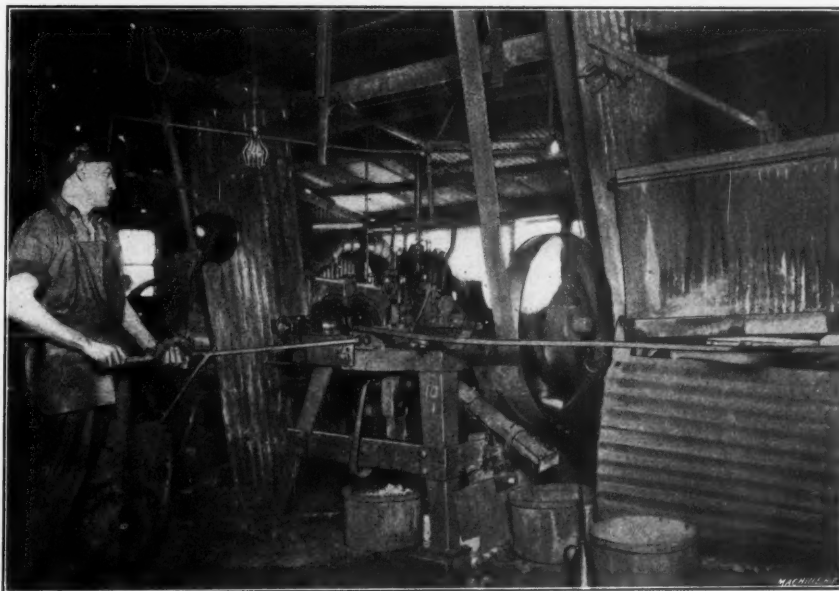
Making Square Nuts in a Hot-forged Nut Machine
